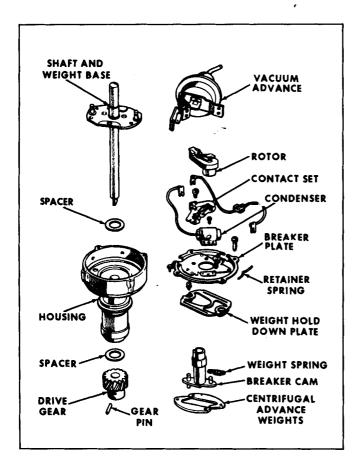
E-50 Exploded View of 6 Cyl. Distributor
